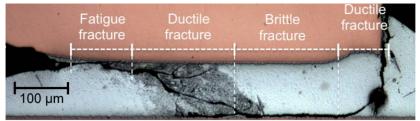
A mechanical fatigue failure of solder interconnection subjected to low amplitude vibration. All three different solder fracture mechanisms (fatigue, ductile and brittle) can be distinguished.
